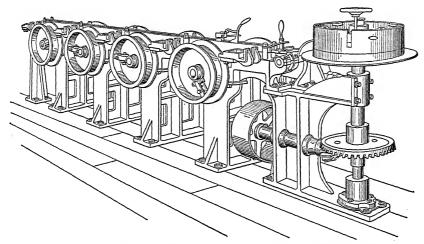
Rankin and Ludington continuous wire-drawing machine.
